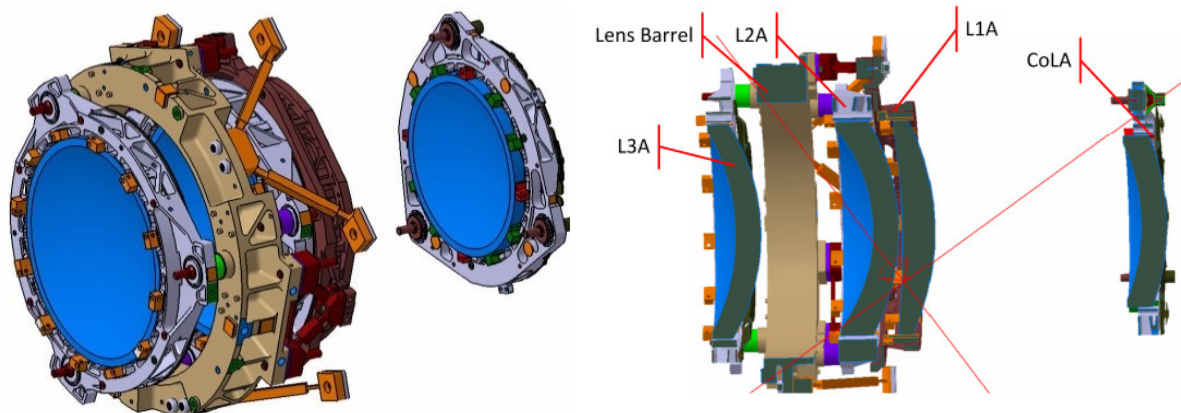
3D CAD view of the Near Infrared Spectro-Photometer Optical Assembly (NI-OA) consisting of the CaLA triplet and CoLA (left), cross-section (right)
